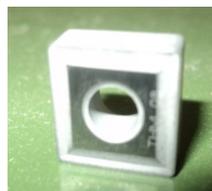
Turning inserts THN SNMG 08Maching Tool
